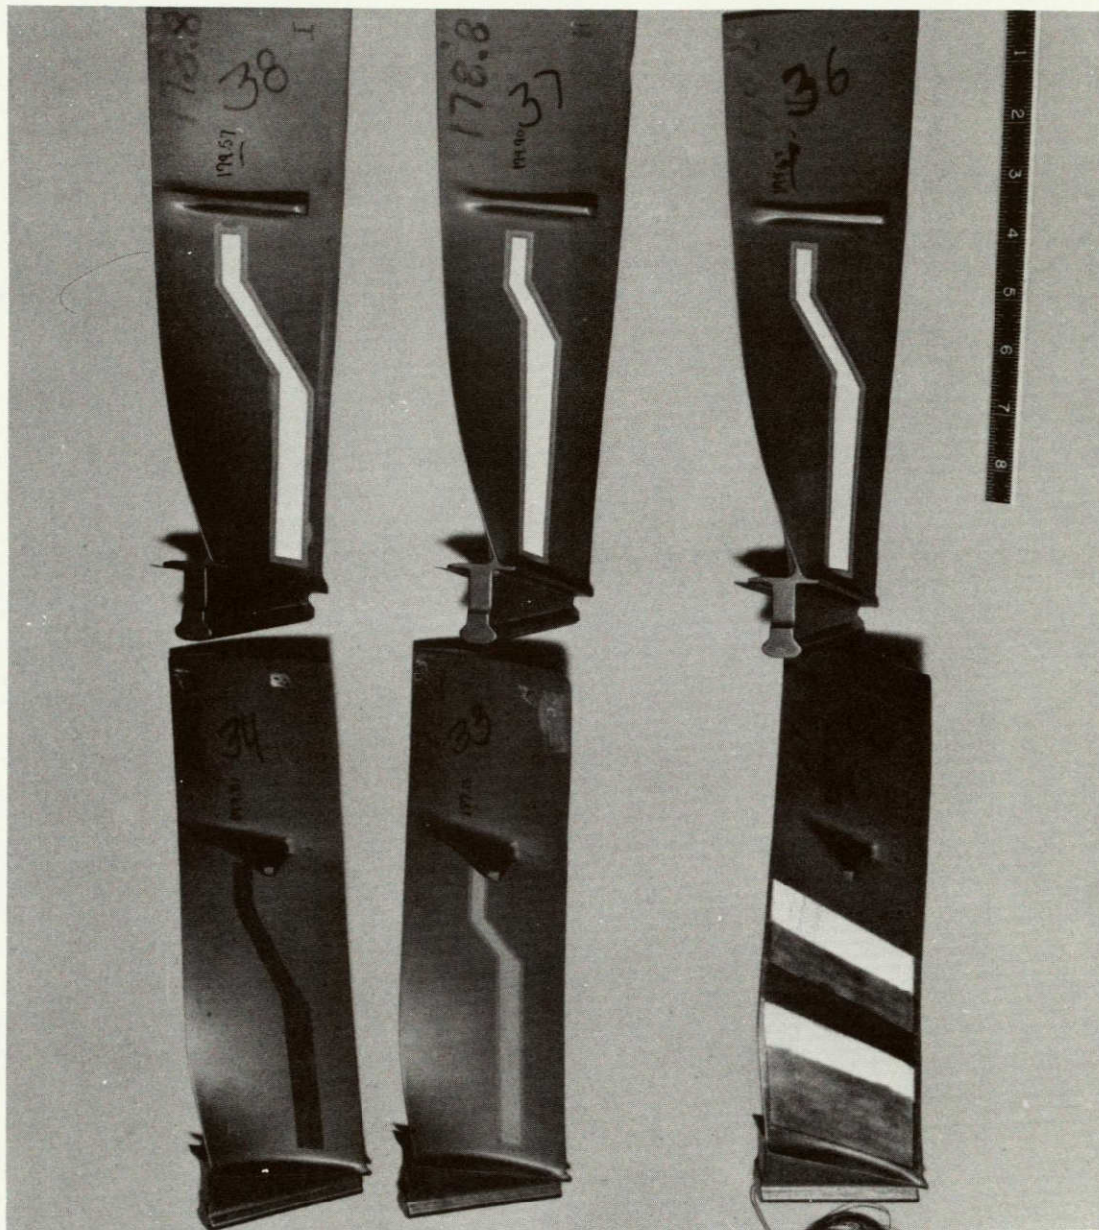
Erosion Patch First Stage Blades S/N 30, 33, 34, 36, 37, 38 Before Testing (77-444-0004-C)
